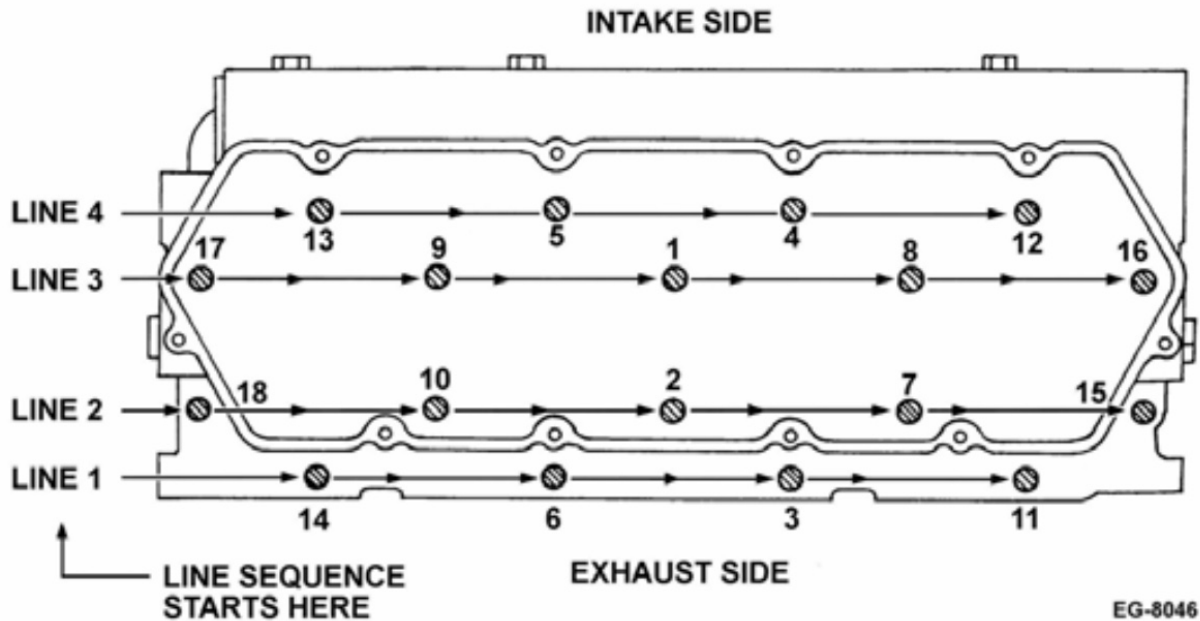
Cylinder Head Mounting Bolt Special Torque Sequence
